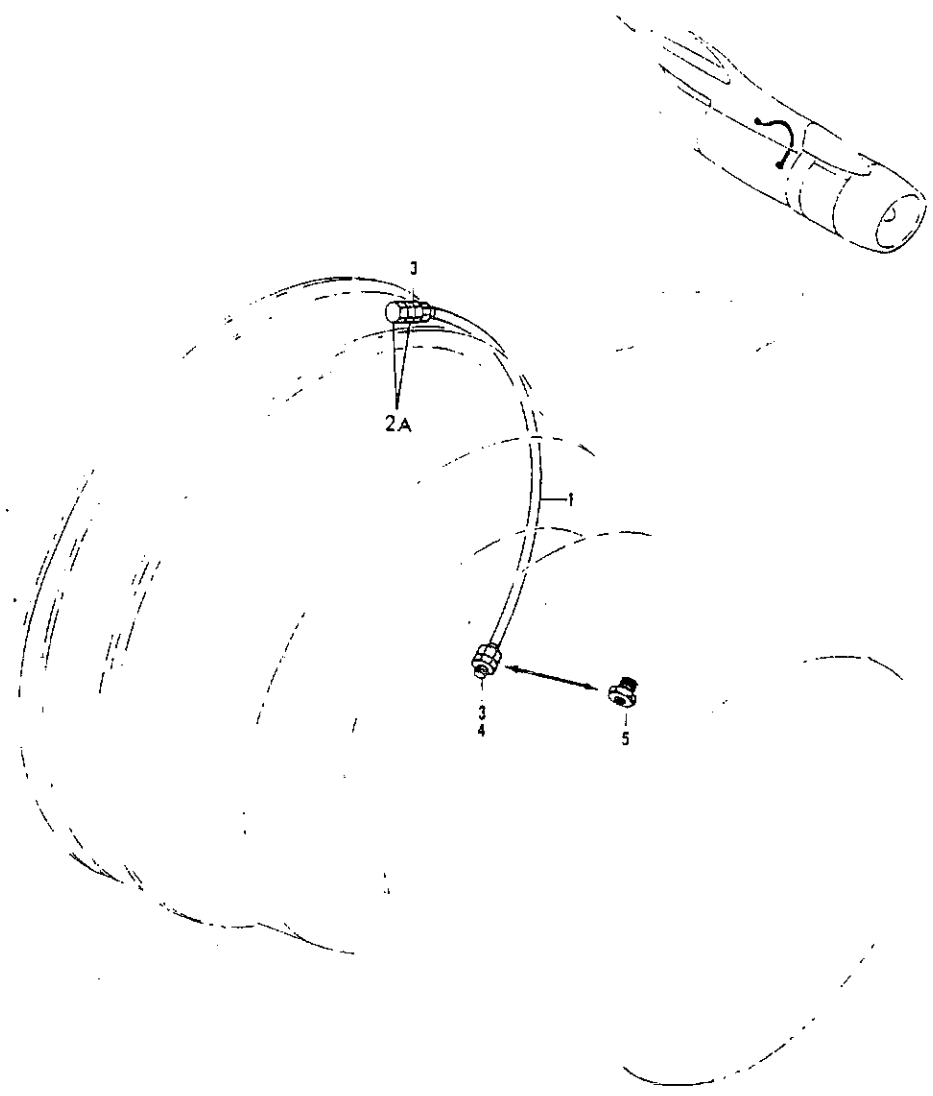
PLUMBING INSTL, FAN ENGINE AIR STARTER AND PLUG (STARTING ONLY)
